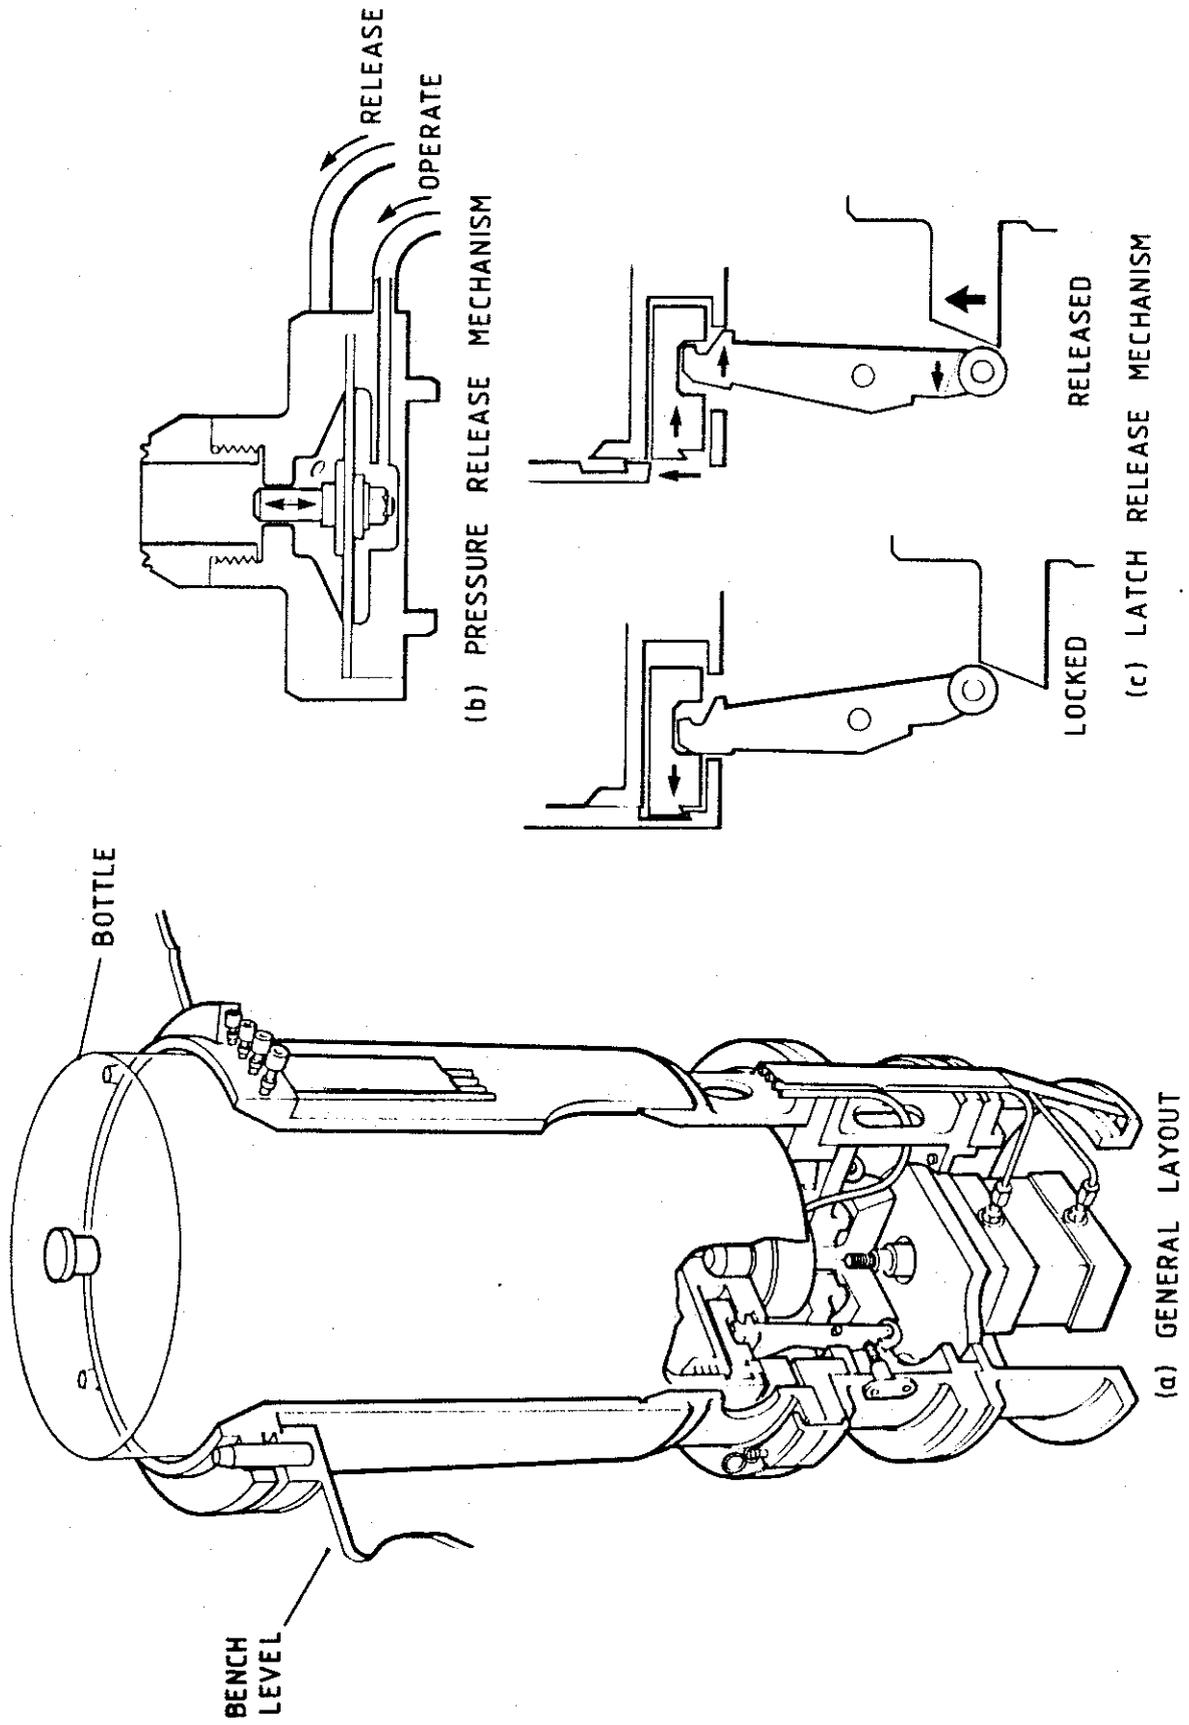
CAP REMOVAL MACHINE FOR HINKLEY TYPE BOTTLES
